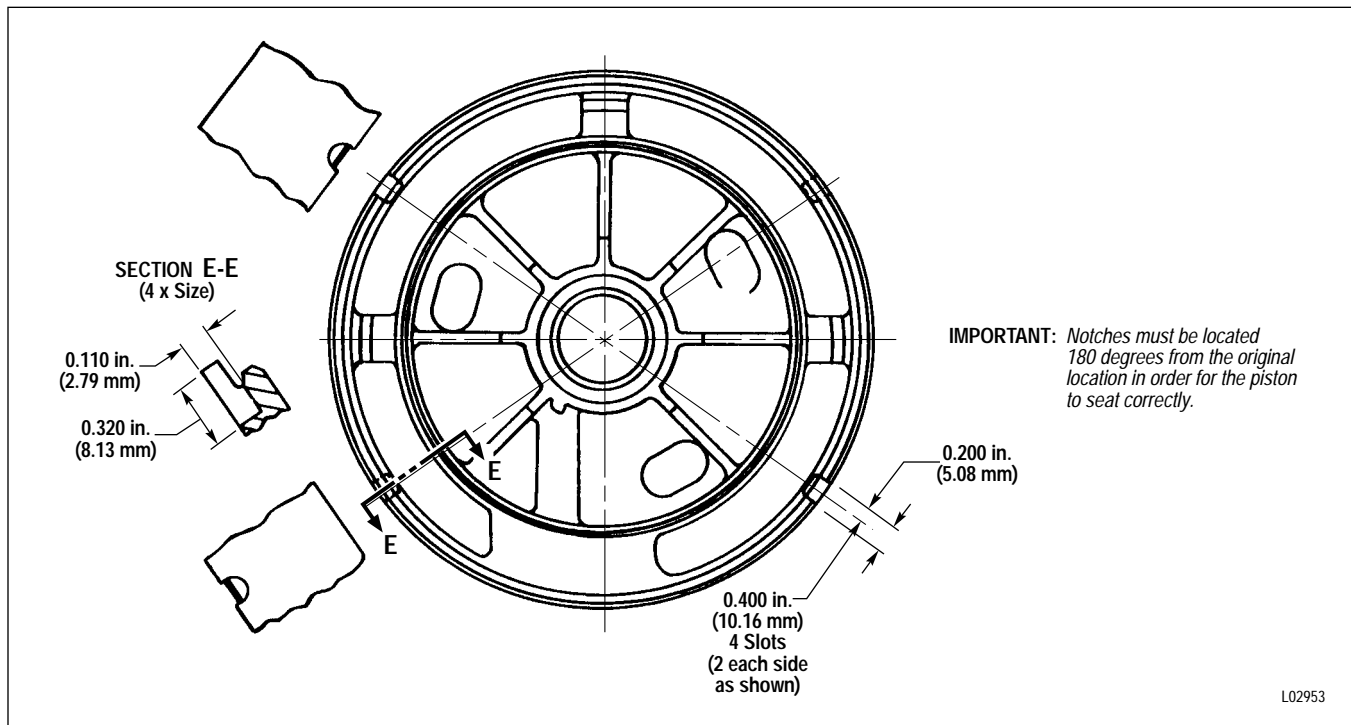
Rework of Center Support Piston Retainer Locating Notches
